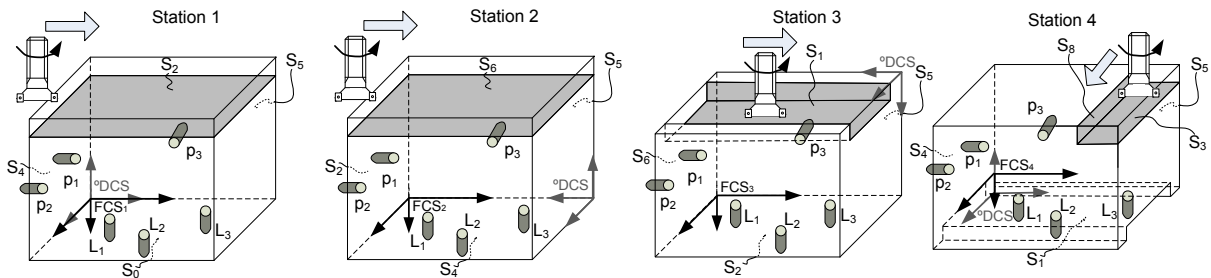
Case study. Part to be machined in a 4-station machining process.
